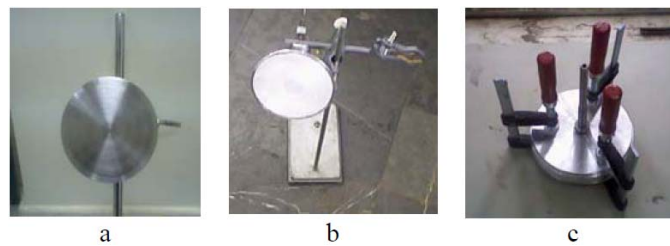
Molding Silicon coating : a- Aluminum Disk, b- Disk covered with Si, c- molding process.
